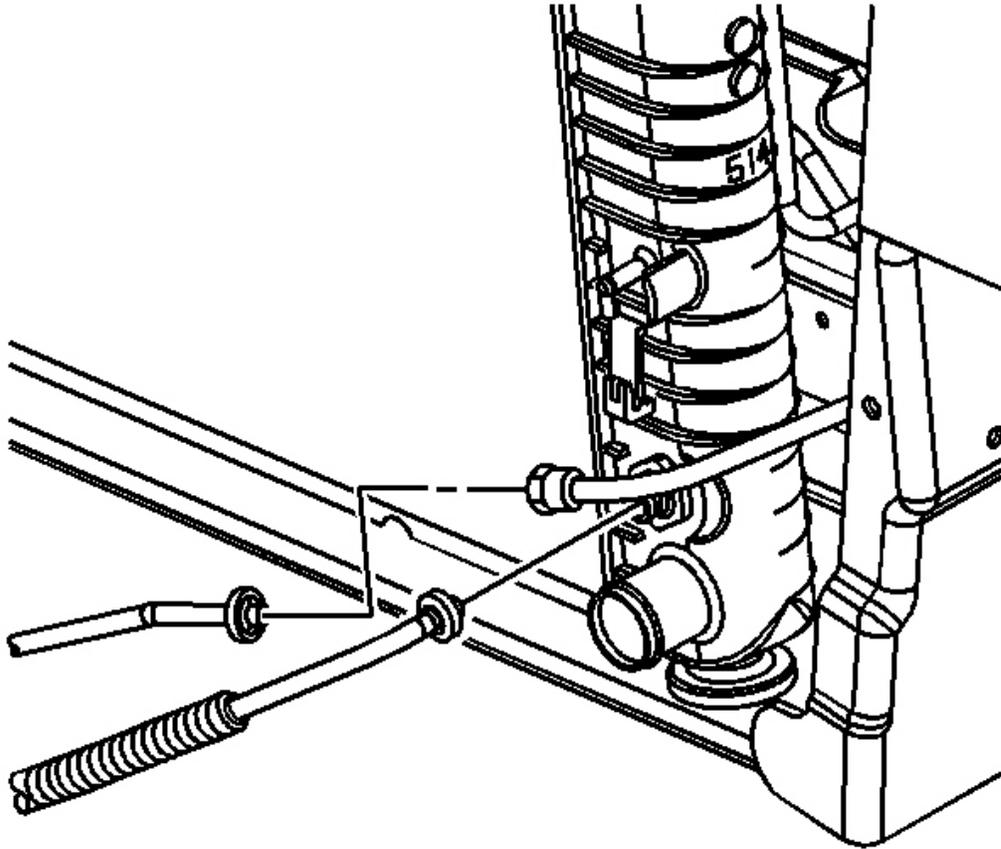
Transmission Fluid Cooler Hoses & Radiator
